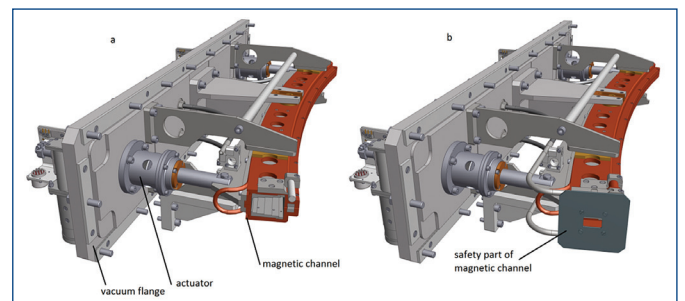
The assembly of the magnetic channel of the heavy ion cyclotron DC-280 a) without the safety part b) with the safety part
